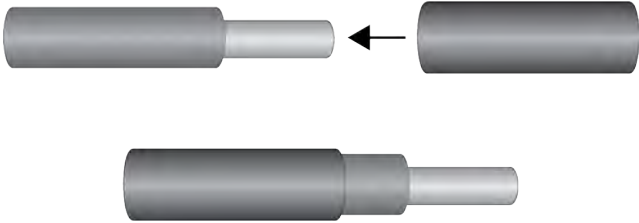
Sliding a Heat-shrink Tube Over the Grounding Wire
